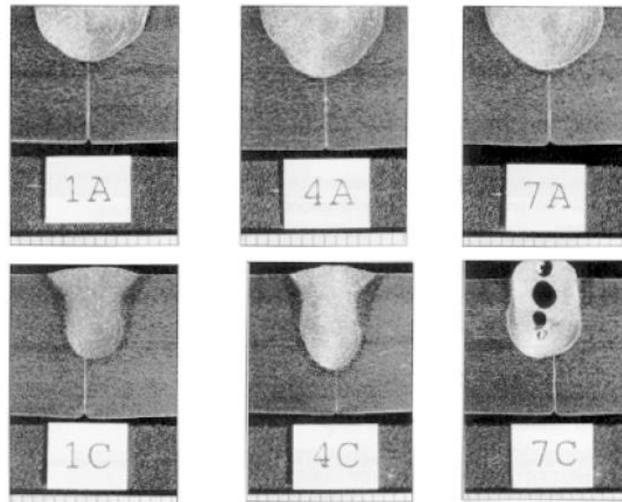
Weld profiles. 1A - Bare plate, Ar shielding gas; 1C - A-TIG flux, Ar shielding gas; 4A - Bare plate, Ar-70% He shielding gas; 4C - A-TIG flux, Ar-70% He shielding gas; 7A - Bare plate, Ar-3% H<sub>2</sub> shielding gas; 7C - A-TIG flux, Ar-3% H<sub>2</sub> shielding gas.
